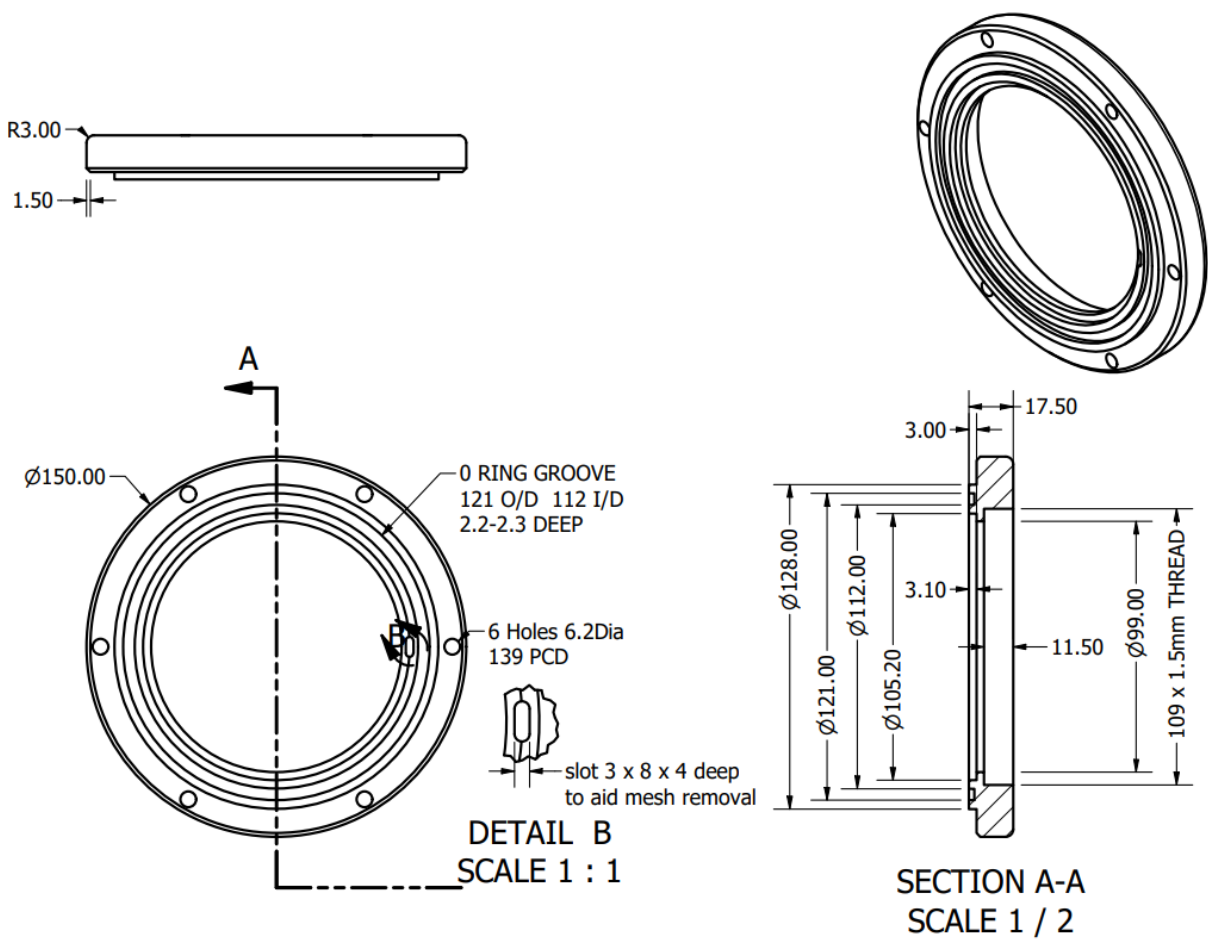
Technical drawing of one of two HPDE screw-thread collars used to secure column shaft to top and base of experimental column.
